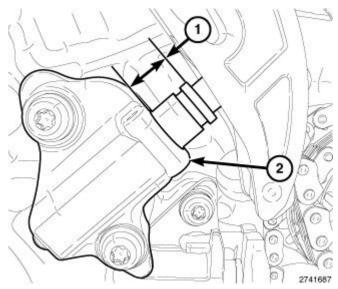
Piston Extension & RH Cam Chain Tensioner Courtesy of CHRYSLER GROUP, LLC
